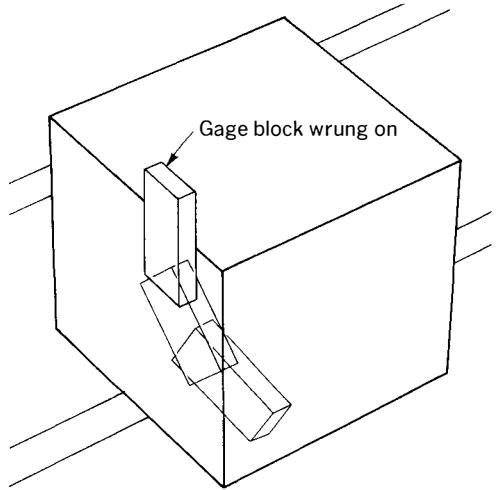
The axis is moved until by eye assessment the edge appears to coincide with the spindle axis.
